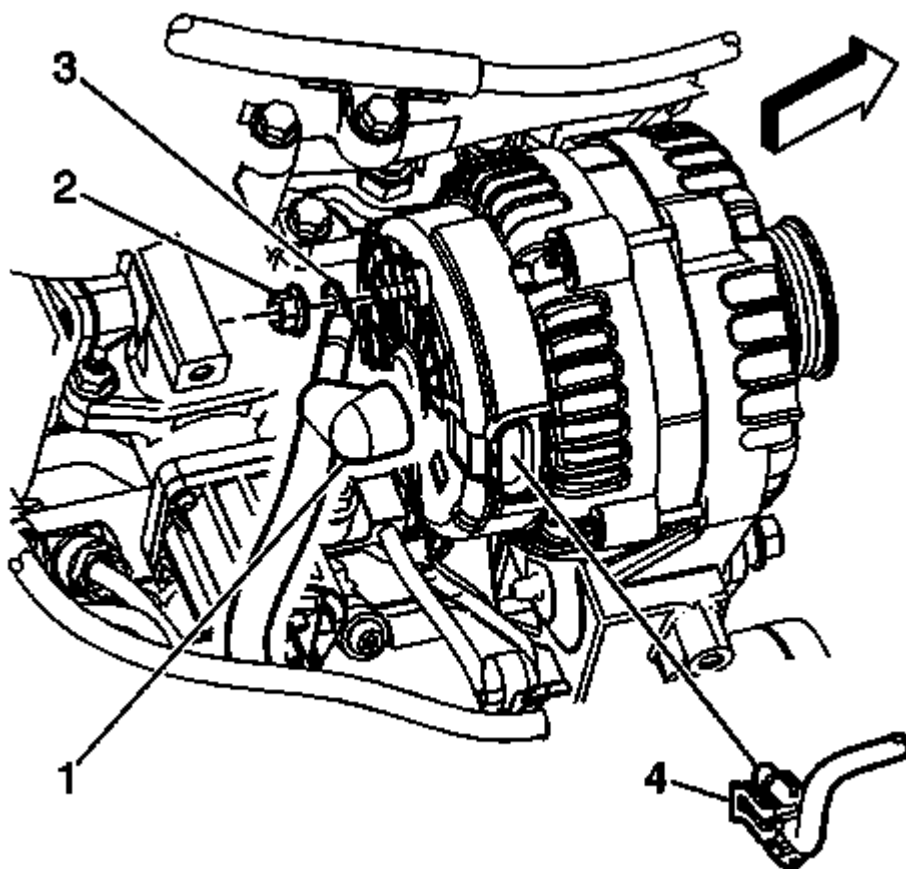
View Of Generator Positive Terminal & Protective Boot
